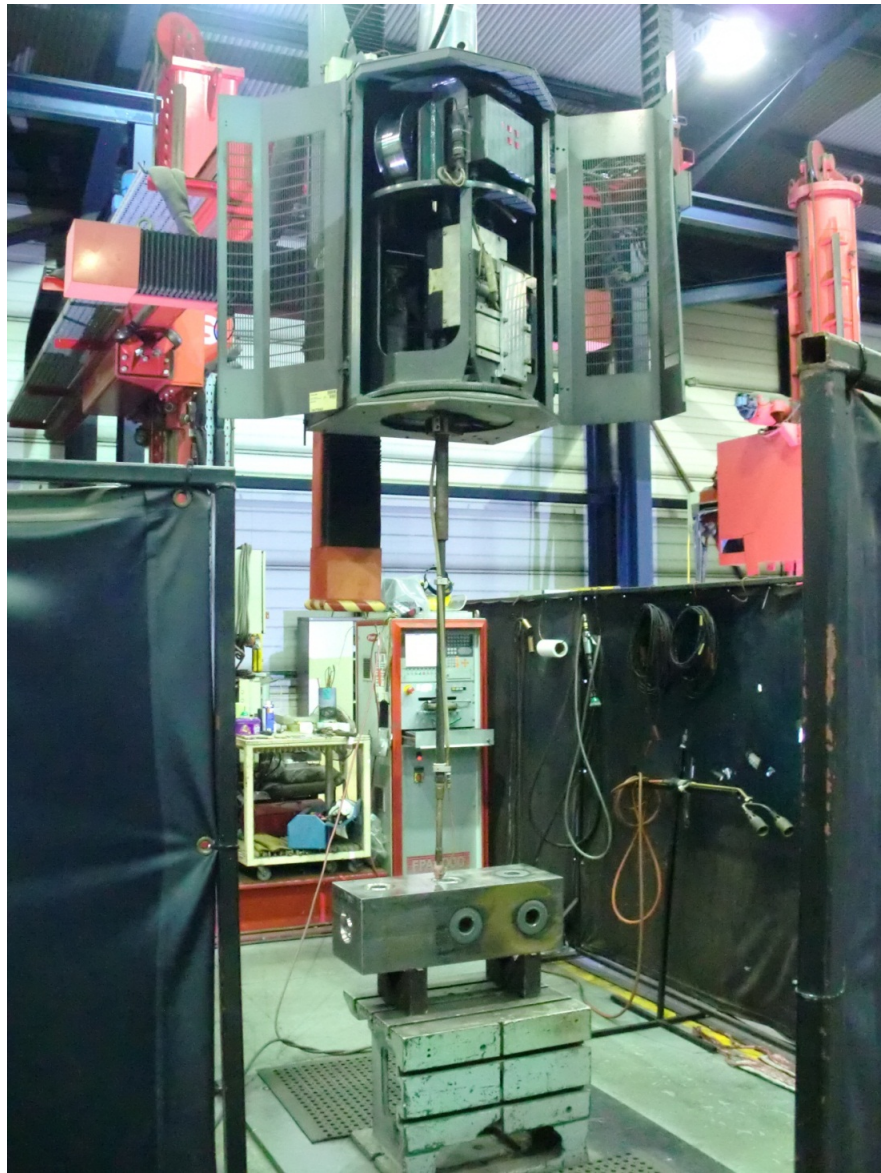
Hot wire GTAW equipment utilised - Weld cladding undertaken by IODS Pipeclad, East Kilbride.
